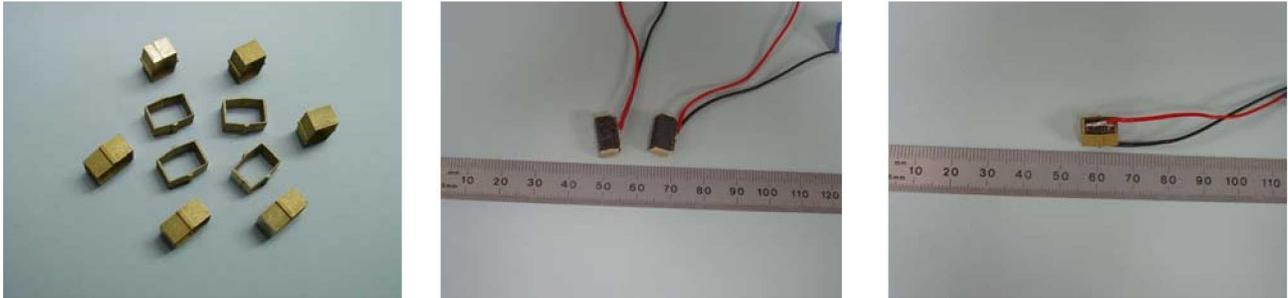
Photograph pictures of flextensional actuator components and assembled actuators. (a) frames; (b) stacks as drivers (5mmx5mmx9mm); (c) assembled flextensional actuator (10mmx5mmx7.6mm).
